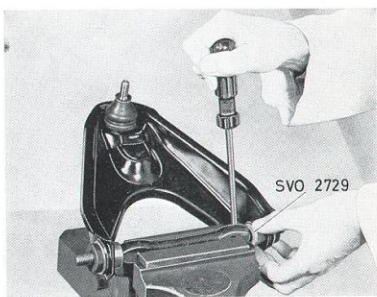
Removing control arm shaft. 1. Removal tool 2729
